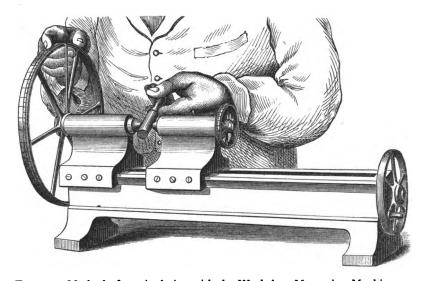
Method of manipulating with the Workshop Measuring Machine.
